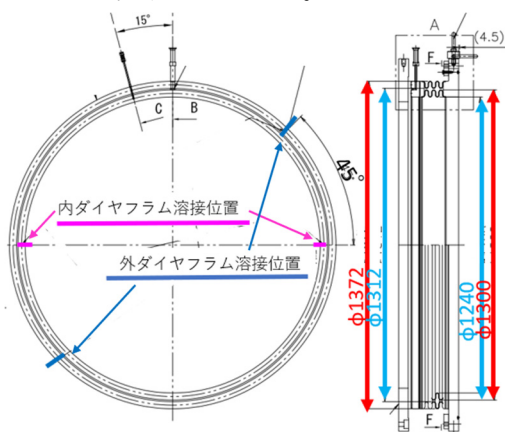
Drawing of the large-diameter pillow-seal. The pink and blue lines in the left figure show the weld seam position of the diaphragm. The unit in the right figure is in mm.
